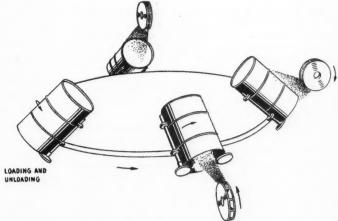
A diagrammatic view of the skew-dished roller conveyor type of blast machine for carrying cylindrical objects past blasting machine.
